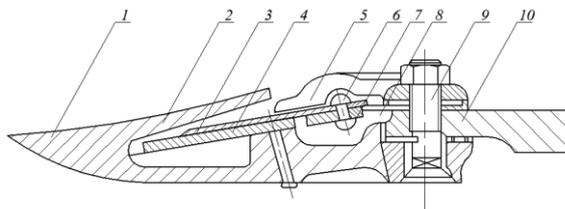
Shear-finger cutting assembly (Bochat, 2010): 1 – finger, 2 – finger's blade, 3 – knife, 4 – liner, 5 – button, 6 – rivet, 7 – movable cutter bar, 8 – guide, 9 – screw, 10 – immovable finger bar
